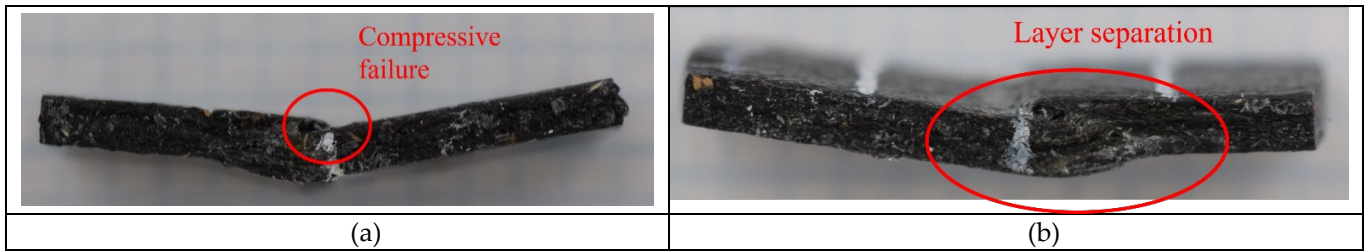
Post-printing consolidated SBS failure sample: (a) compressive failure on the top surface; (b) mid-layer separation with the kink on the top surface.
